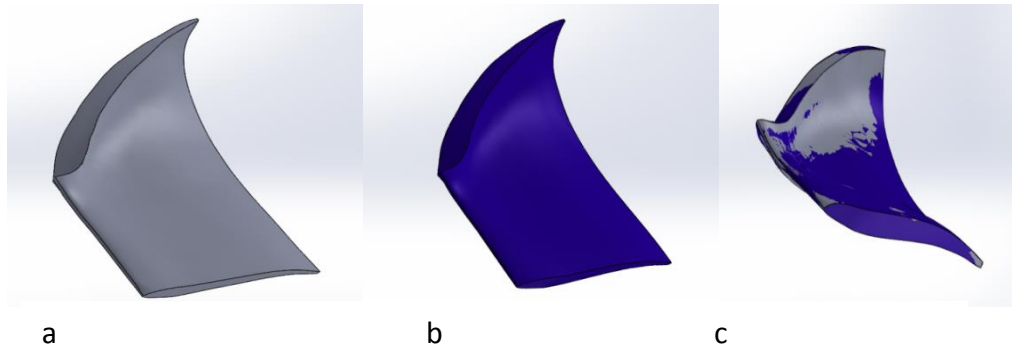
(a) Scanned Blade (b) Reverse Engineered Blade (c) Superposed Blades
